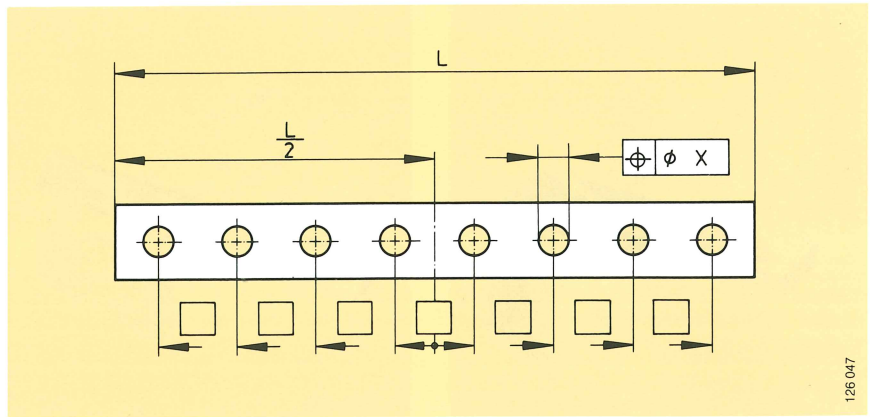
Dimensioning of the hole pattern for guideways with fixing holes
